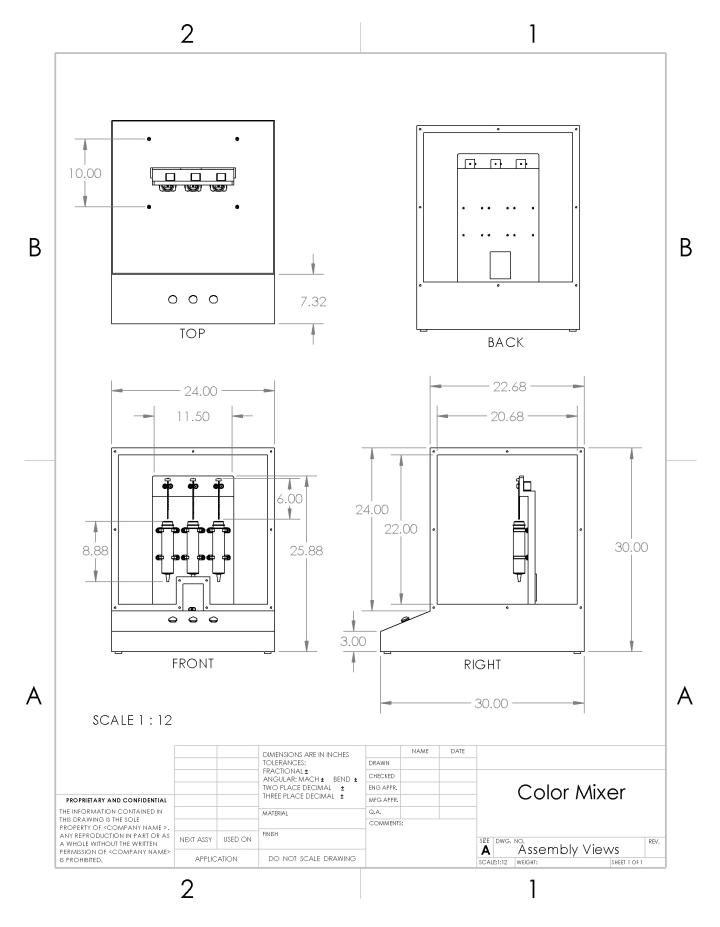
Color Mixer CAD embodiment top, front, back and side views with basic dimensions
